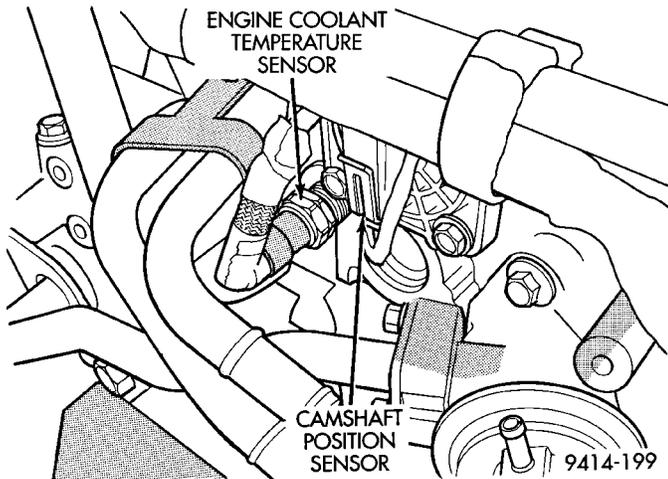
Engine Coolant Temperature Sensor—SOHC
